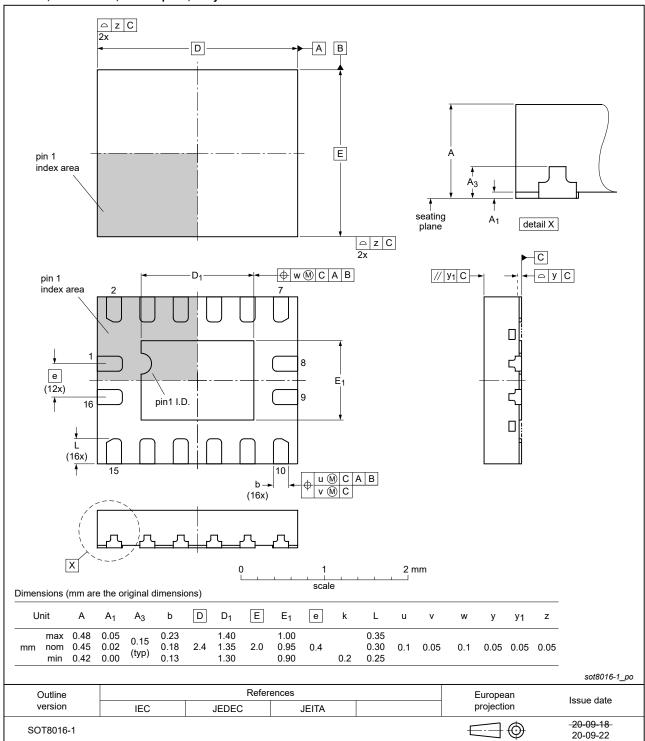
Package outline SOT8016-1 (DHXQFN16)
